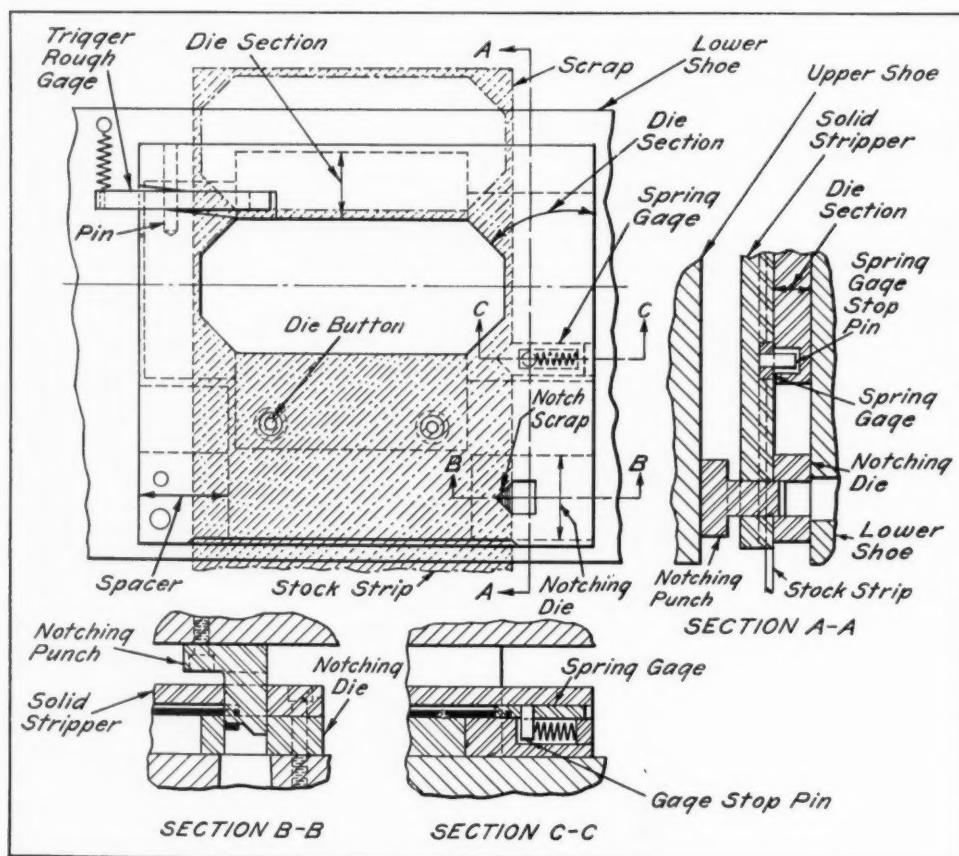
Finish-gaging by a Notch in the Side of the Stock Strip
